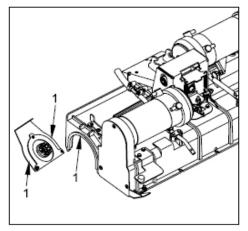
Cylindrical Scrub Head / Brush Cover Idle Plate
